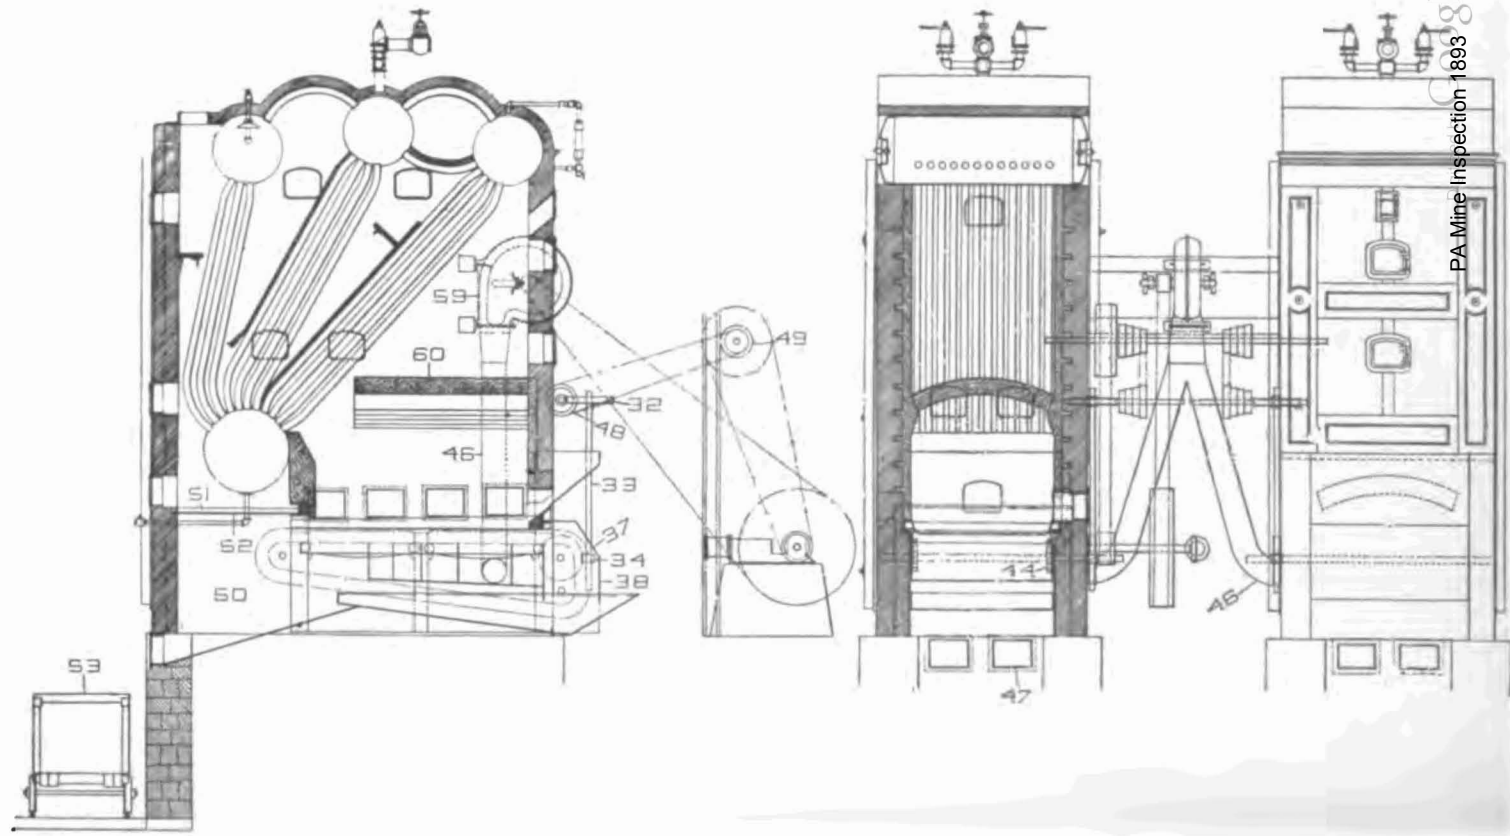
PLATE IV.—Side and transverse elevation of the Stirling boiler plant at No. 3 Colliery, Oneida, Pa.
